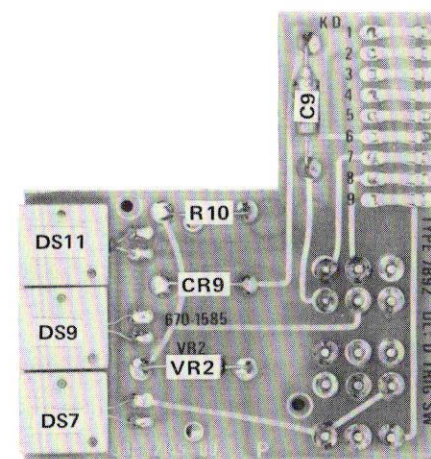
Delayed Trigger Switch circuit board A4.
